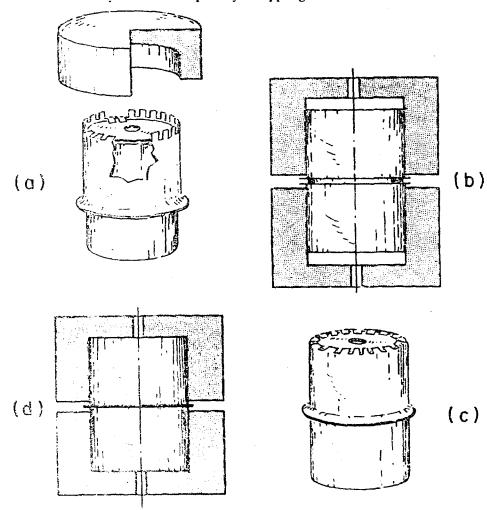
High-temperature pressure welding of resonant cavity; (a) foil formed on sandrel, two are made. Faces are welded by hot-pressing; (b) welding of flanges by hot-pressing with sample inside; (c) finished dielectric-filled davity; (d) cavity in graphite container as used during measurements.
